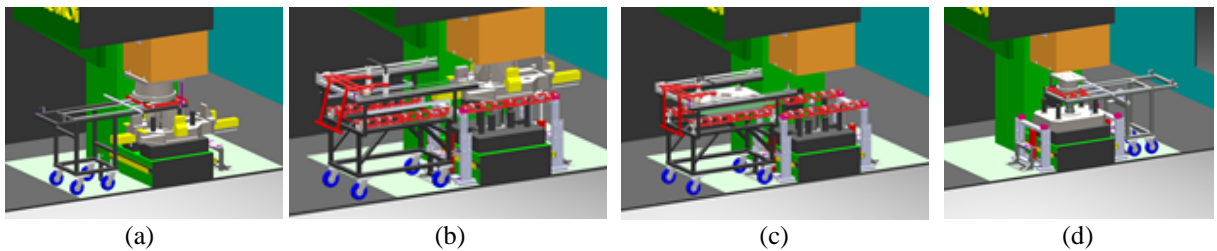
Mechanical system (a) Cart for lower die (b) Cart for upper die (c) Lifting platform.
